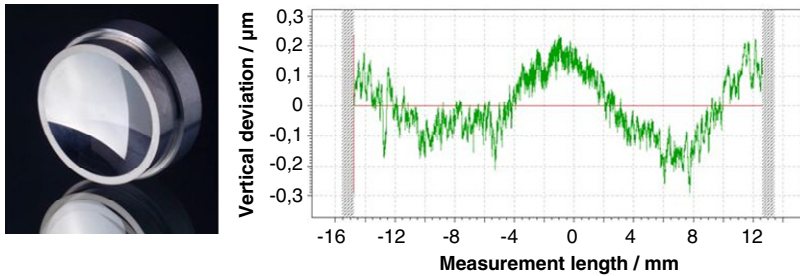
Mold insert produced by precision grinding with ECM-dressing
